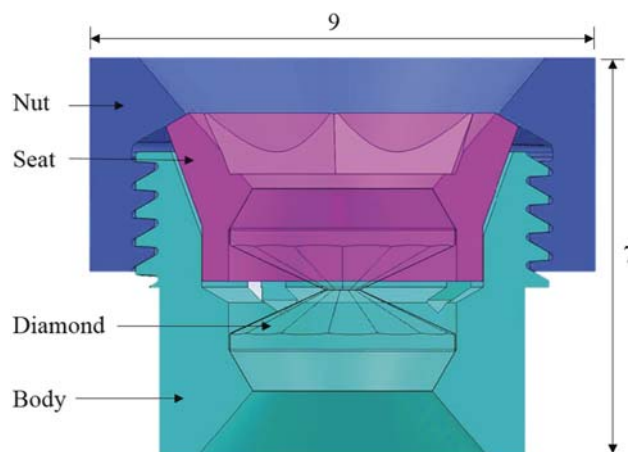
The cross-sectional view of the CAD model of the cell with key dimensions (in mm).
